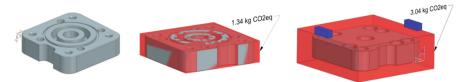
Top cover of the pneumatic cylinder assembly (left),  $CO_2eq$  of a minimum required aluminum block for the top cover without offset (middle) and with 5 mm offset and symbolic clamping attachments (right)
